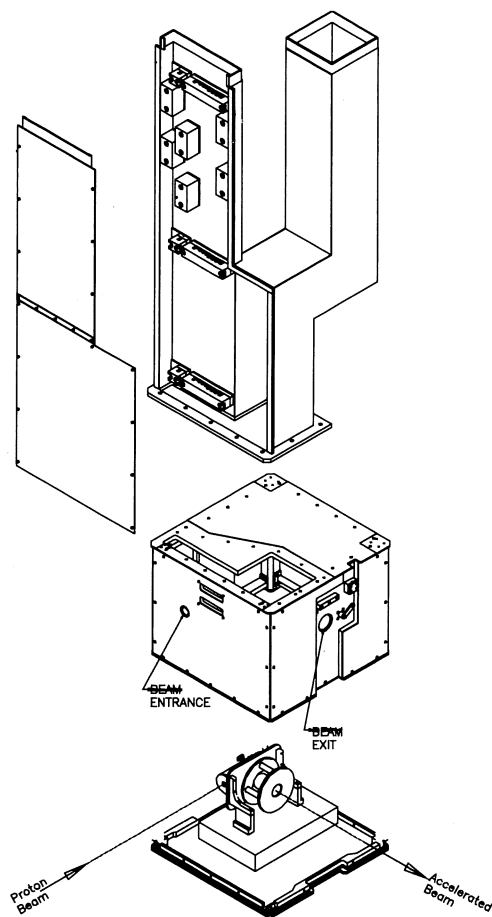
An exploded view of the target/ion source module, showing the containment box below with the target/ion source on its alignment plate. At the top is the vacuum exhaust chase and the service duct. The space surrounding these is filled with steel shielding.
